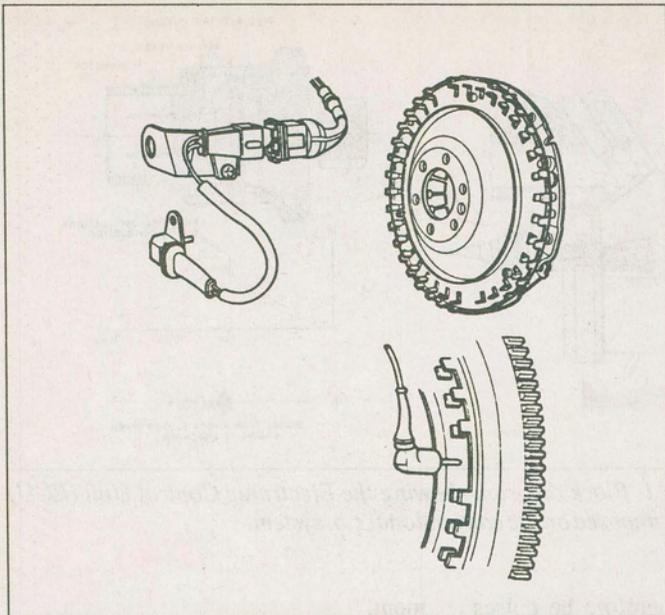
Flywheel reluctor sensor. This comprises a magnet with a projecting pole piece and a reluctor disk on the flywheel.
